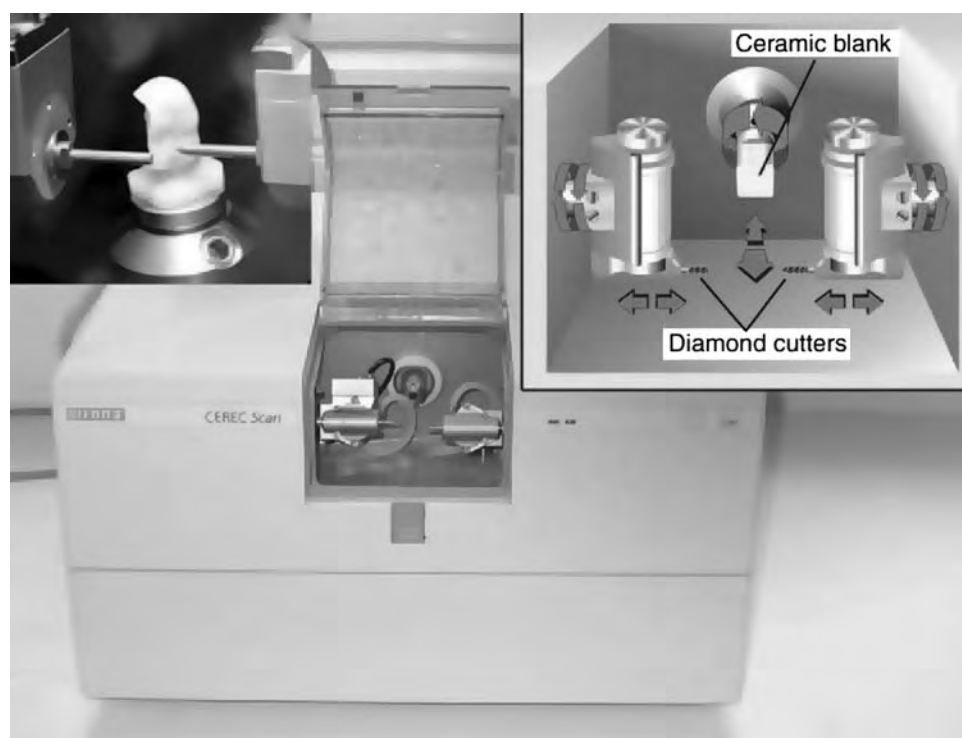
A Cerec CAD-CAM milling unit. Inset left: machining an onlay restoration. Inset right: detail of the movements possible with the milling cutters.
